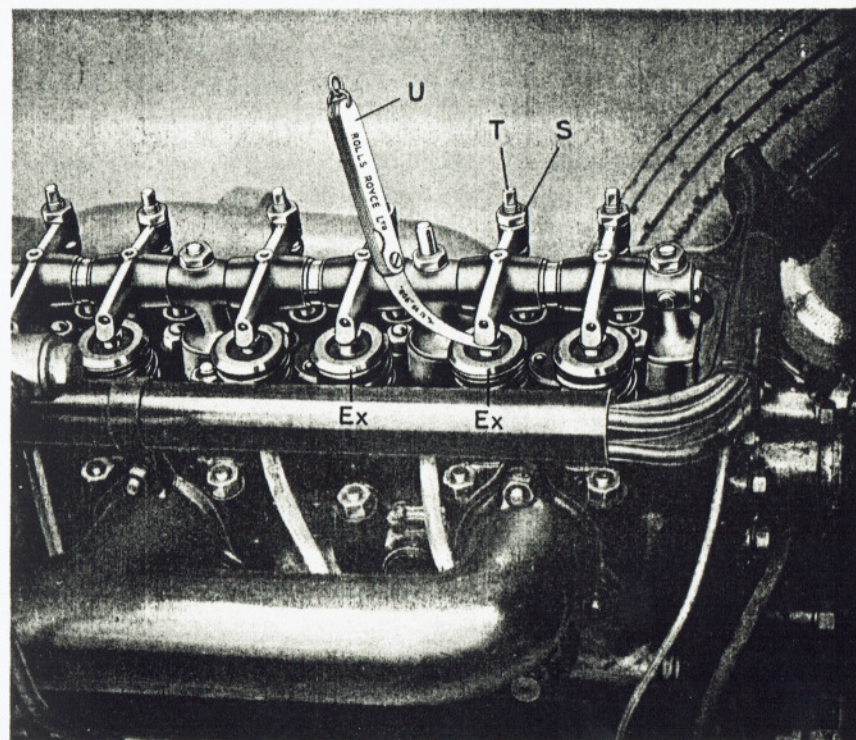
ADJUSTING THE VALVE ROCKER CLEARANCES.
